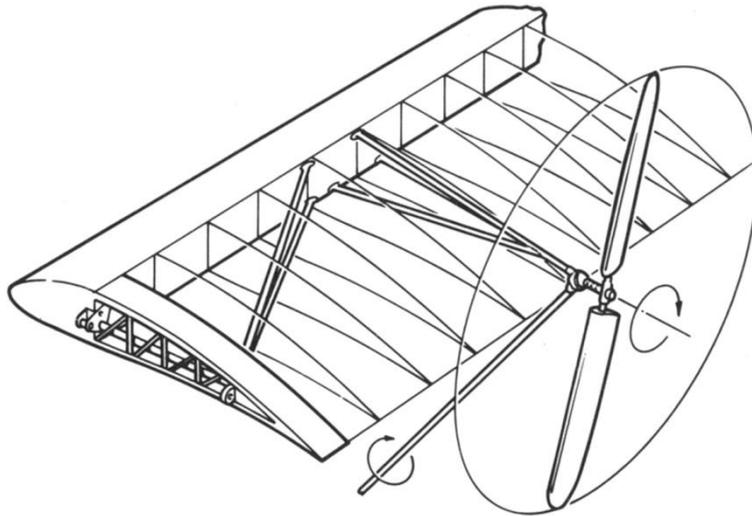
Proposed gearbox design for a propeller drive mechanism.
